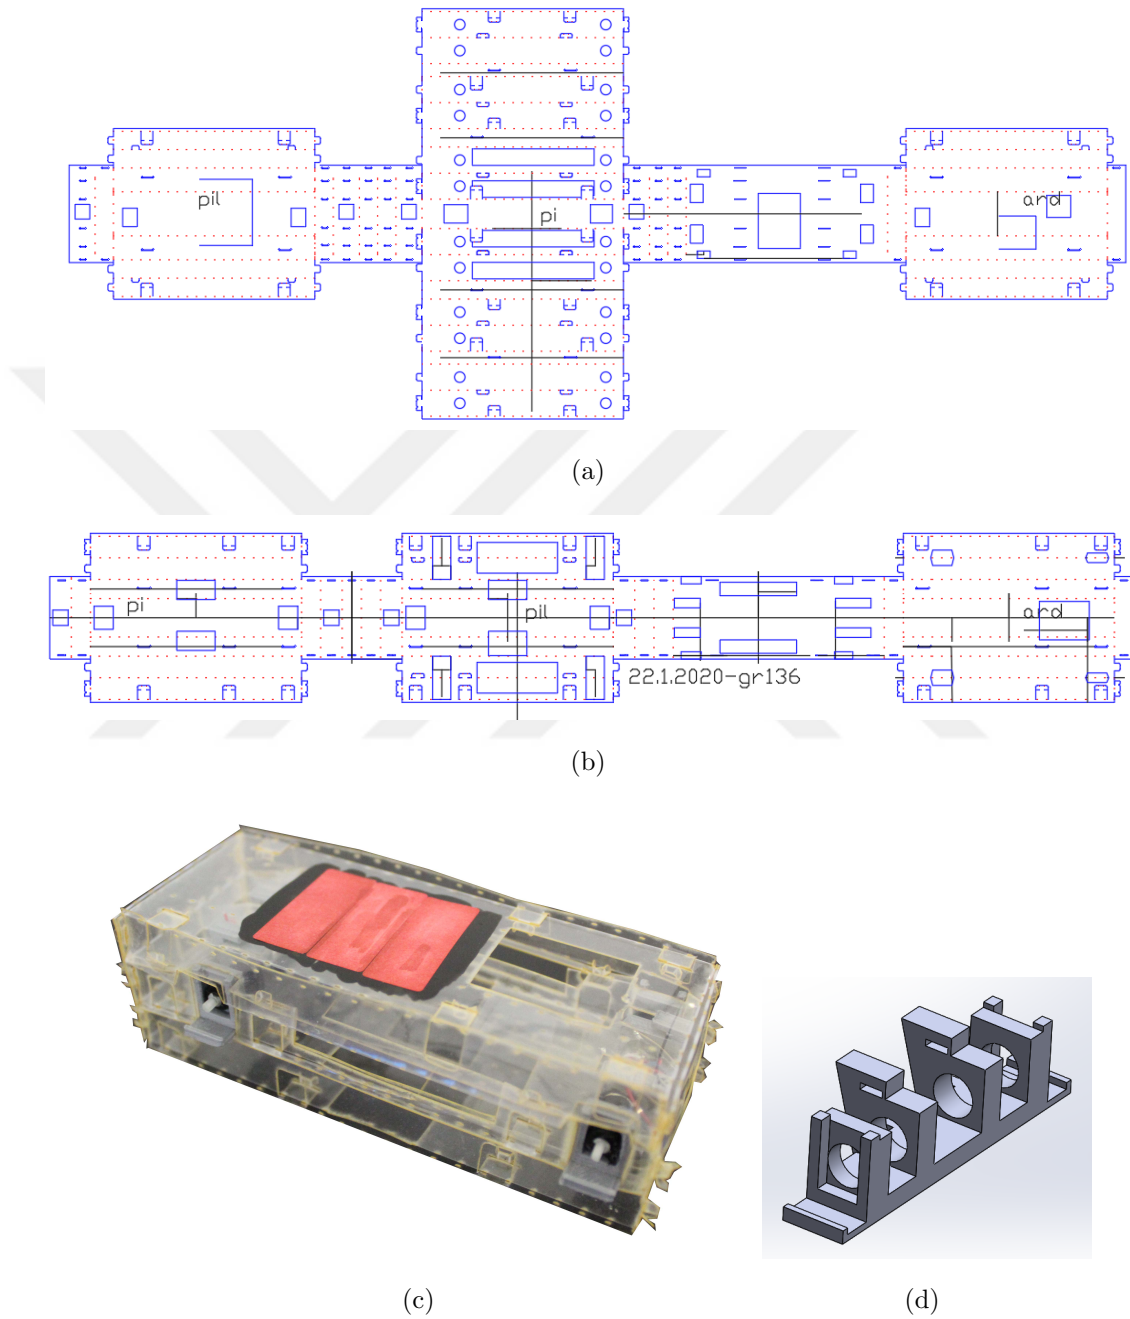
(a) AutoCad design of the first version without motor casing (b) AutoCad design of the second version with motor casing, (Implemented body (d) Motor casing: PLA 3D-printed)
